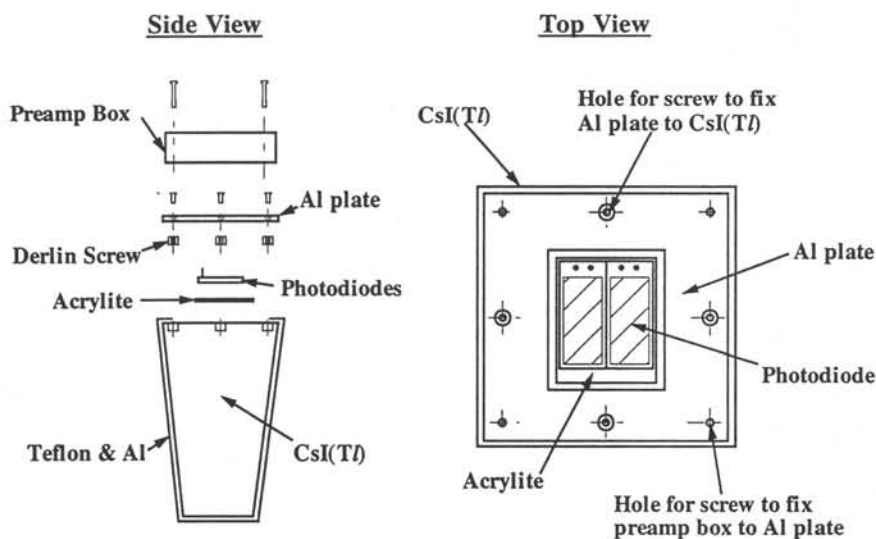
The mechanical assembly of the CsI(Tl) Counter.
